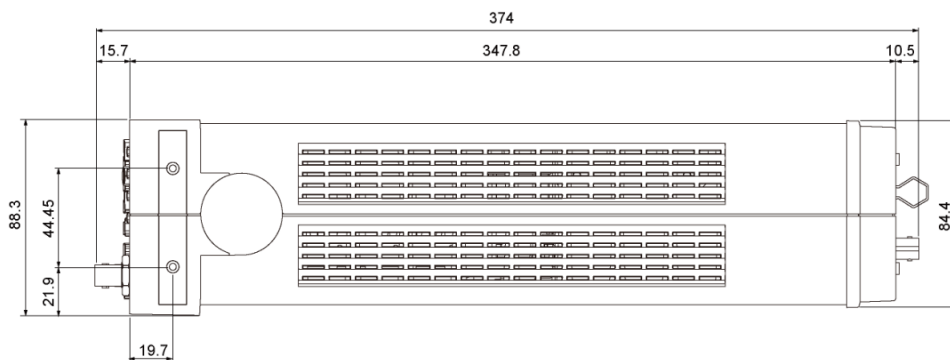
Dimensions (side view, without handle and bumper, in millimeters, nominal)
